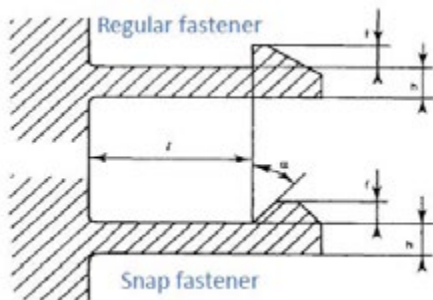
Difference in geometry for fasteners: while the snap fastener is easy to disassemble, the regular fastener with a right angle will require special tools and will risk breaking if not done carefully.
